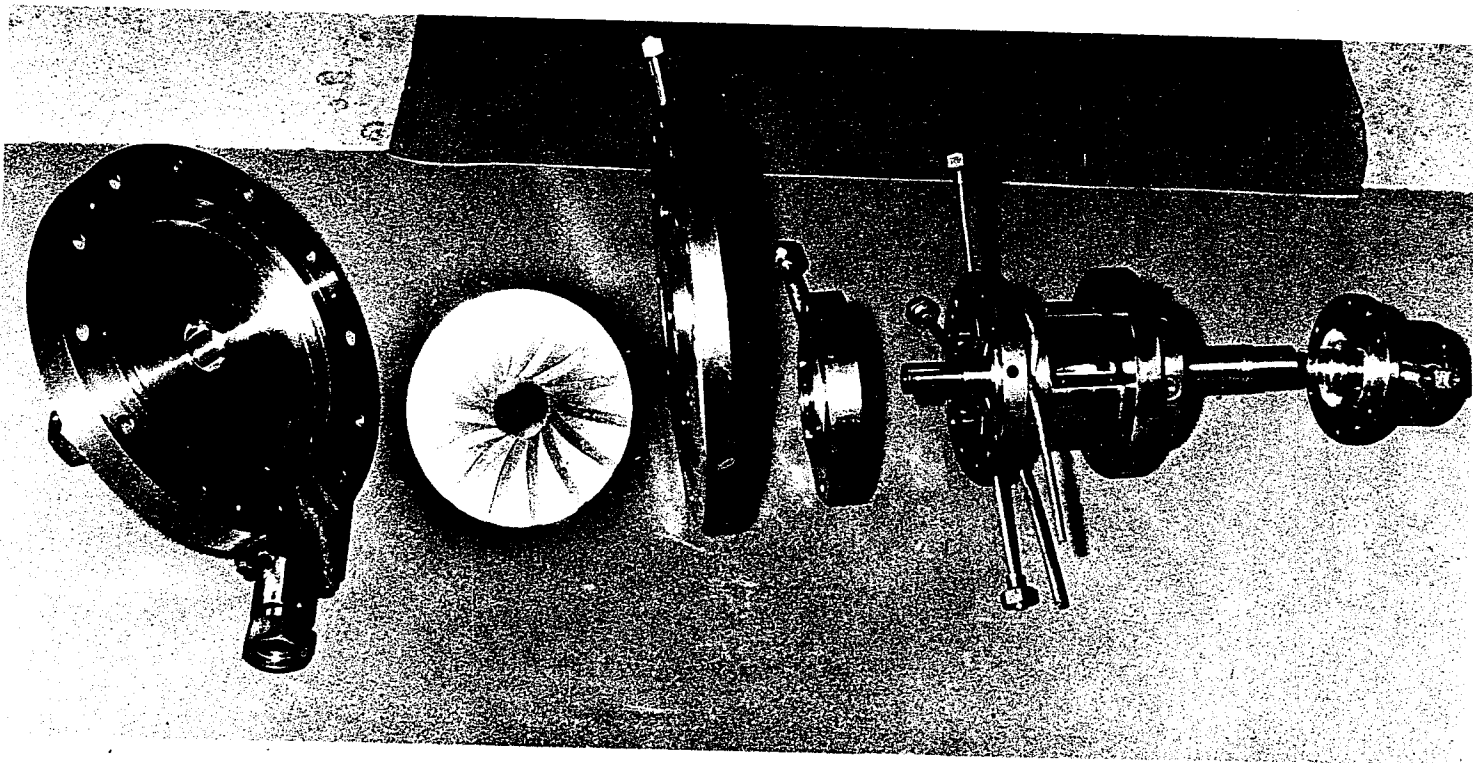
EXPLODED VIEW OF CIRCULATOR ASSEMBLY.
